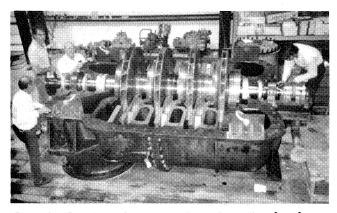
Four Stage Compressor Rotor Being Fitted in Shop.
